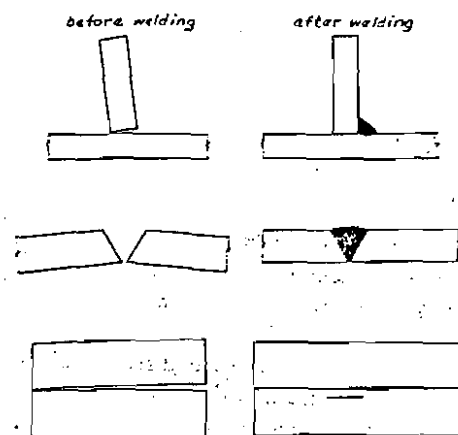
Parts are often preset so that weld shrinkage will pull them back into correct alignment.
